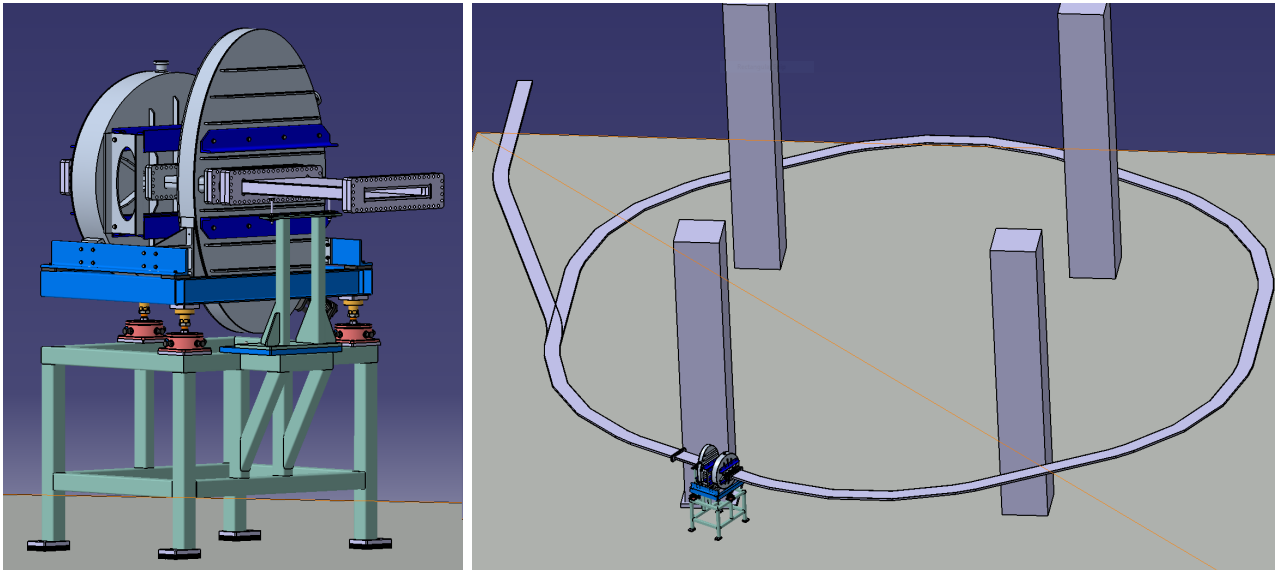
A construction based on our design for R3. Drive units for plungers are not shown in this picture. Construction made by P.Doll @ GSI [61]. On the right side illustrated the installation place inside the R3 ring. The left picture shows the vertical building columns.
